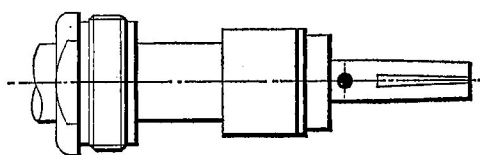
B—Assembly instructions—N Type plugs and sockets—Captive contact
